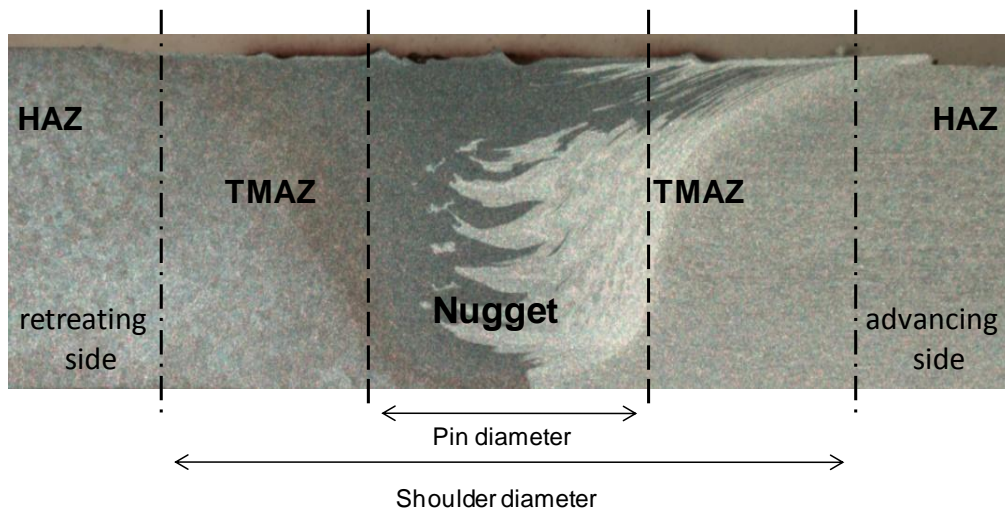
Macrostructure of dissimilar weld.
